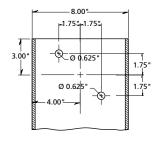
DETAIL POST ASSEMBLY 8 x 6 FRONT ELEVATION
